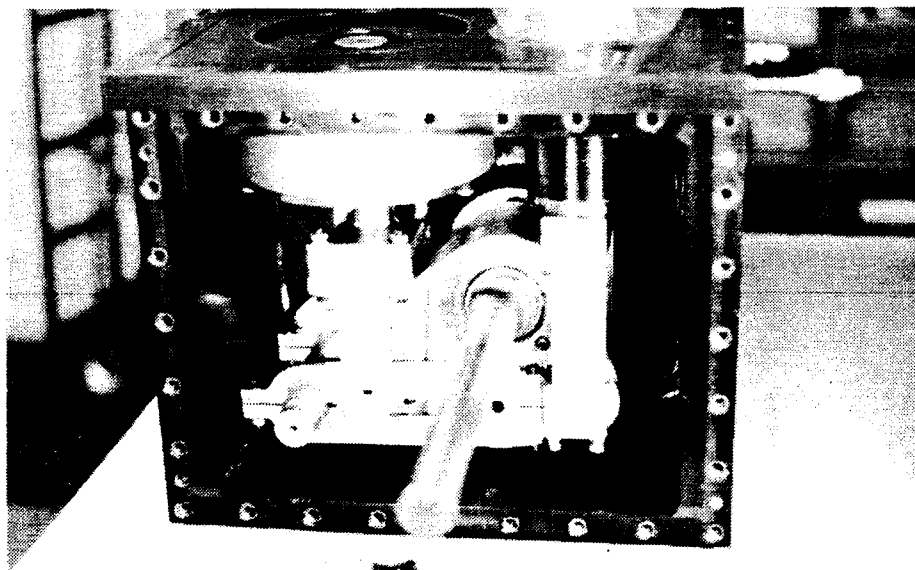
DRIVE MECHANISM AND BELLOWS ASSEMBLED INTO CRANKCASE
